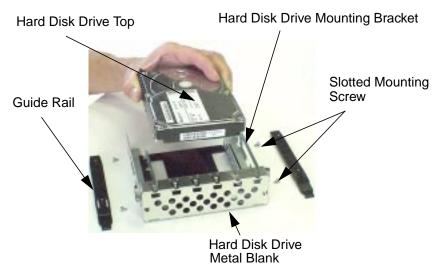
Removing the Hard Disk Drive Guide Rails and Mounting Screws
